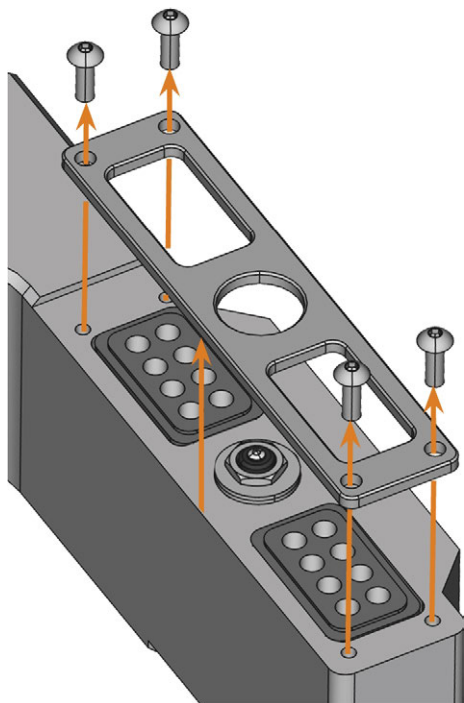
UNSCREWING THE SCREWS AND LIFTING THE COVER
